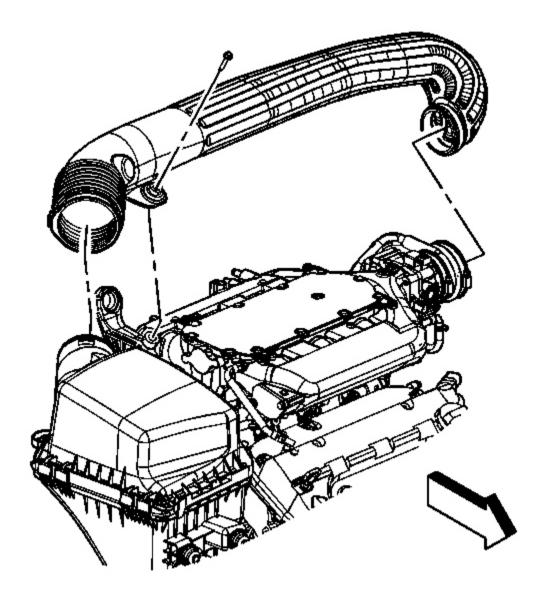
View Of Outlet Resonator/Duct Assembly Courtesy of GENERAL MOTORS CORP.
